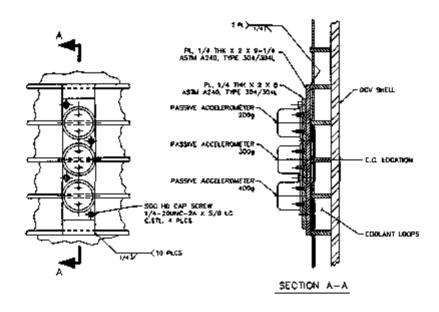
Passive Accelerometer Mounting Details.
